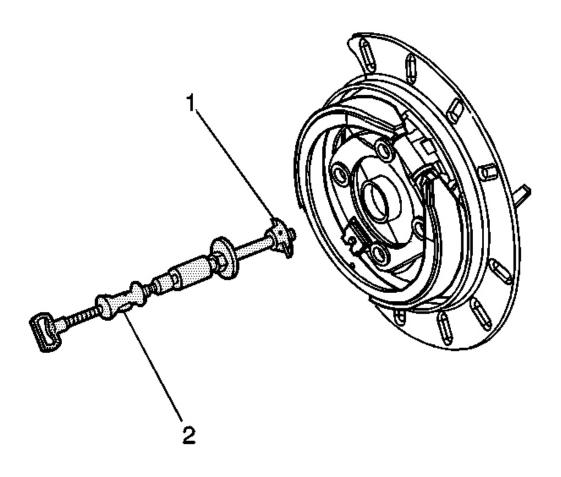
J 44685 & J 2619-01 Courtesy of GENERAL MOTORS CORP.
